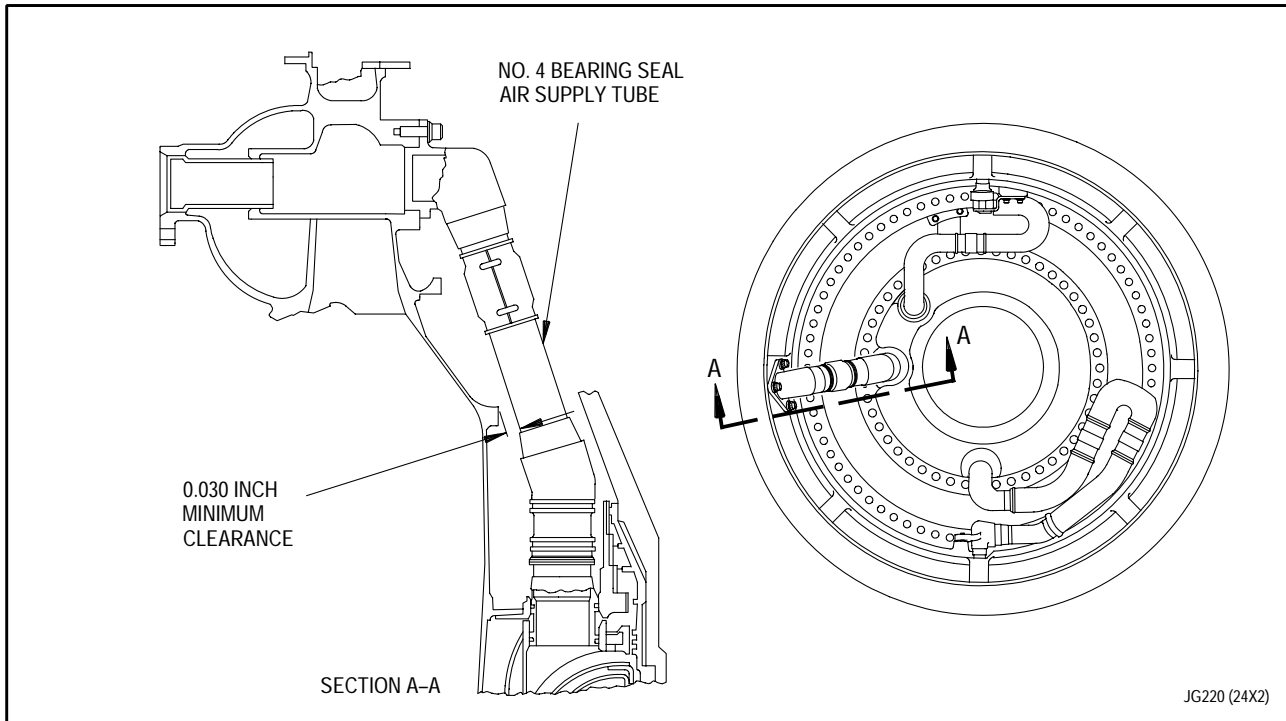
Clearance Check Between Diffuser Case Stiffener and No. 4 Bearing Seal Air Supply Tube
